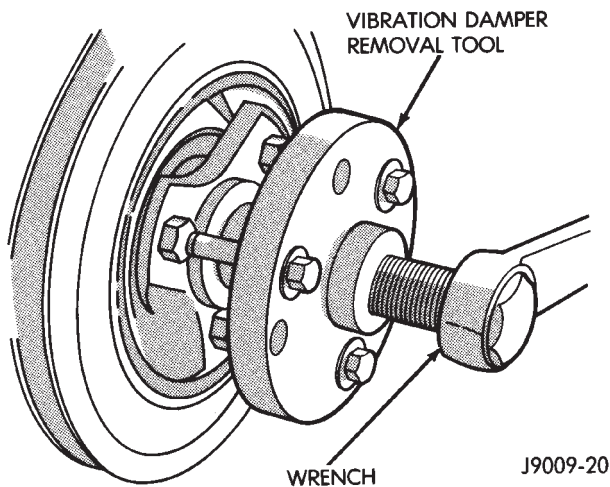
Vibration Damper Removal Tool 8068 (J-21791-01)
